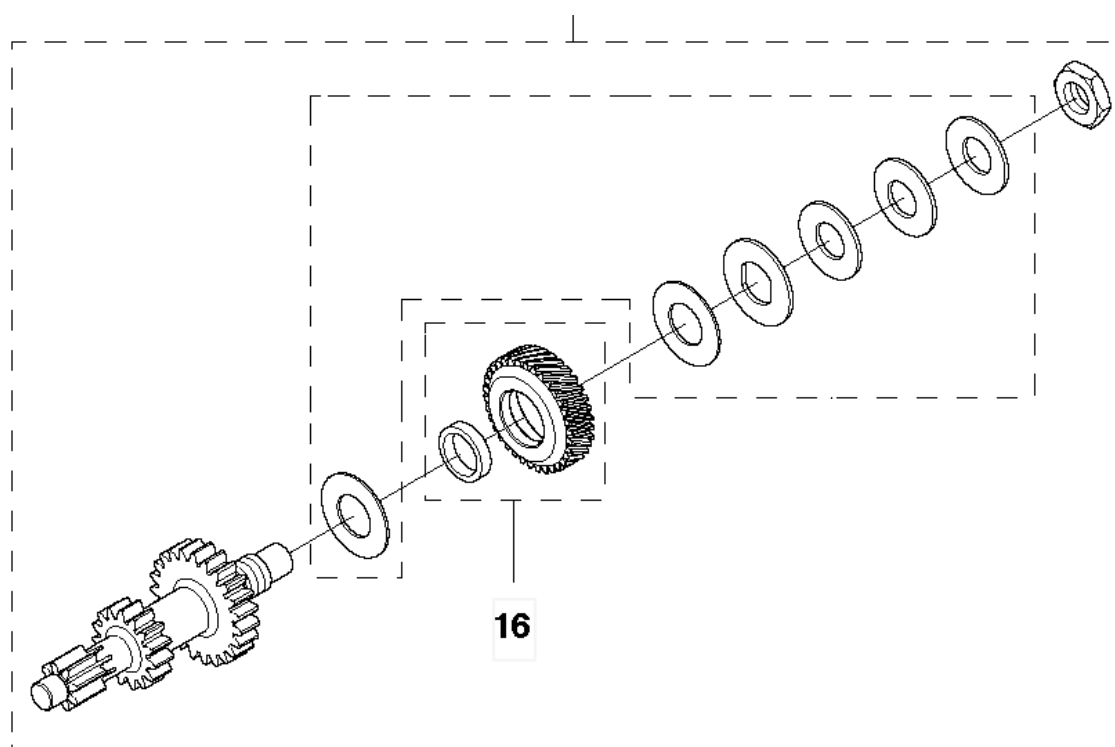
Showing affected spare parts. Note that the bushing and gearwheel (16) are not affected.
